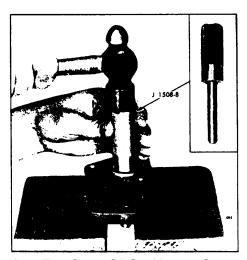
Installing Outer Oil Seal ' 1970 General Motors
